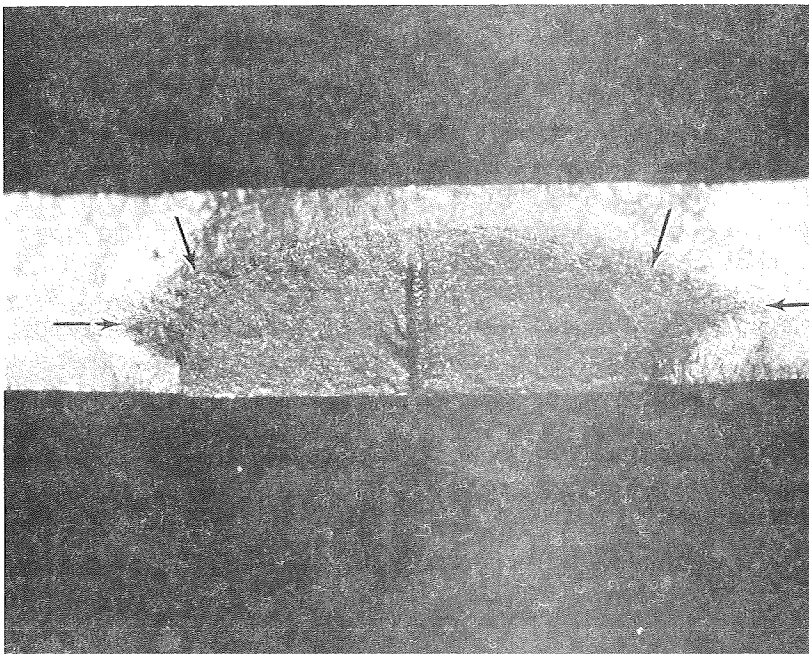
Fracture Face of Specimen Showing Tunneling Behavior (specimen 6DP-4; 0.060-inch; water)
